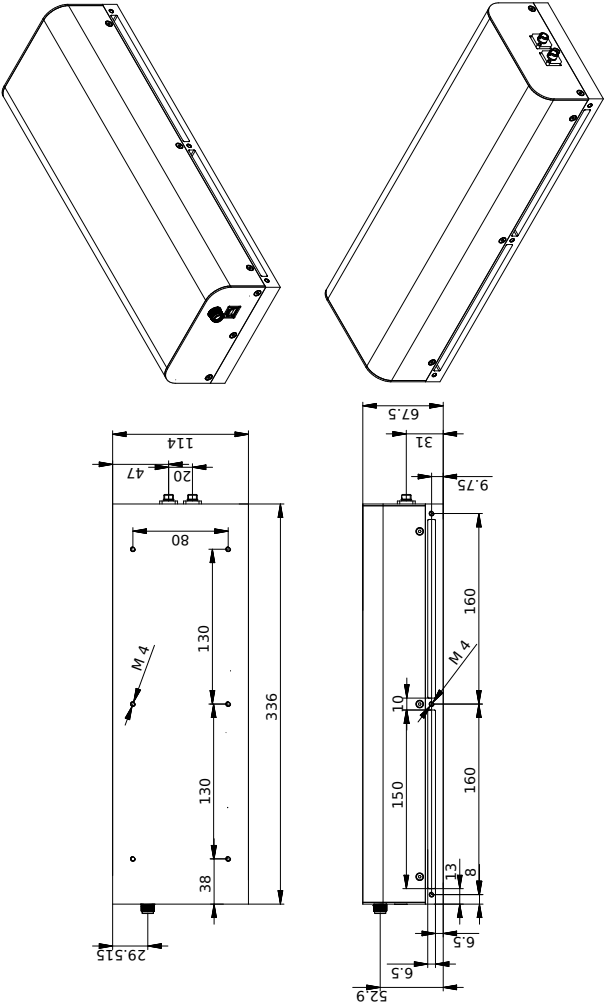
Mechanical drawing of the EPPS. All dimensions in millimeters (mm).
